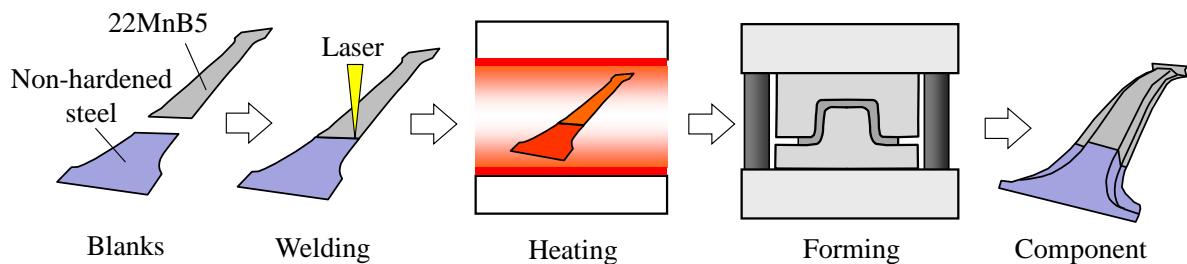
B pillar made of tailor-welded blank.
